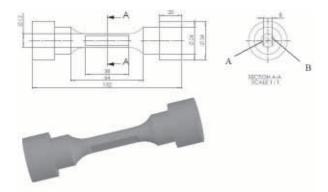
Geometry of the specimen used in fretting fatigue tests
